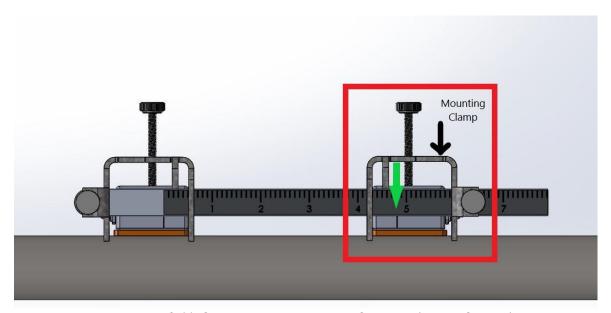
Spacing Locating Point on Small Rail/Fixture System
